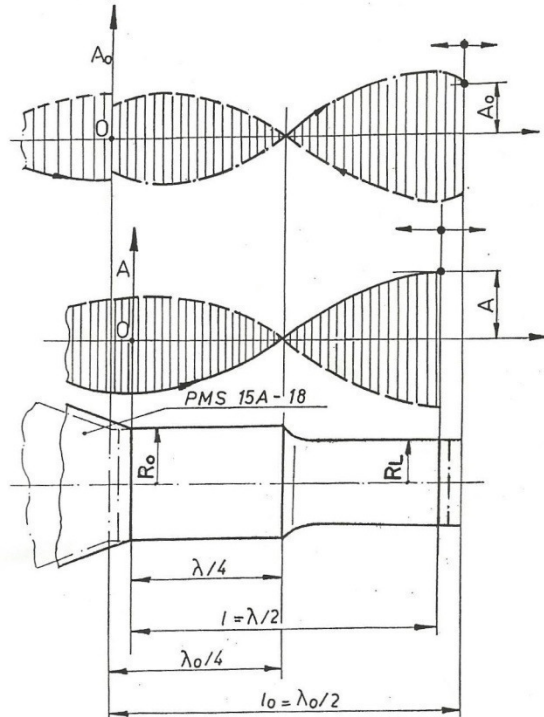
Dimensional testing and adjusting of the working graded cylindrical concentrator length by using the resonant method.
